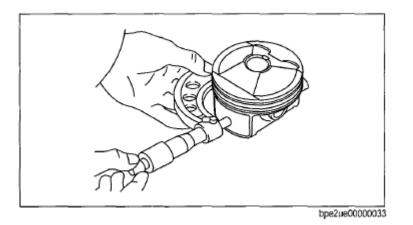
Measuring Piston Outer Diameter Using Micrometer
